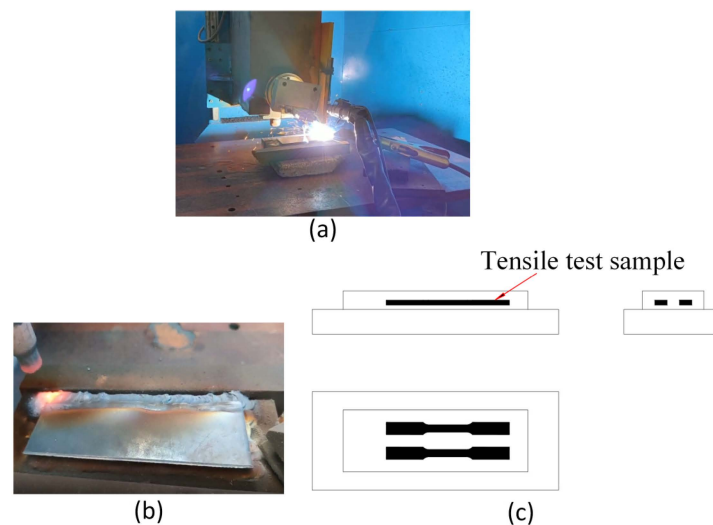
The LOM equipment and sample position: (a) CNC machine with TIG gun, (b) LOM process, and (c) tensile test sample position.
